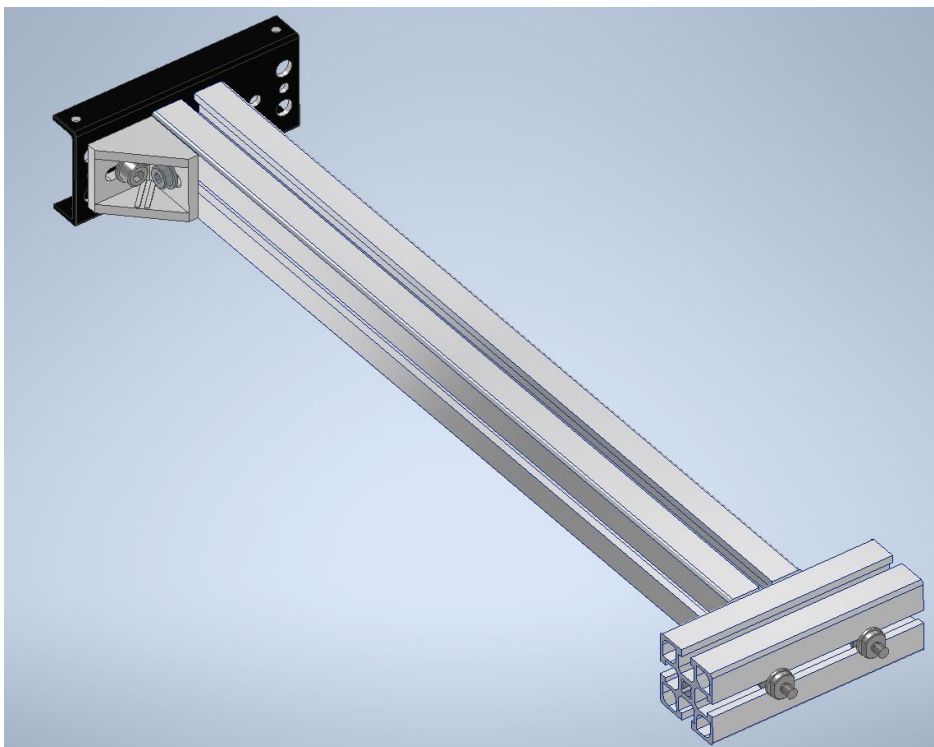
The extension piece with a fastening part in Autodesk Inventor.
